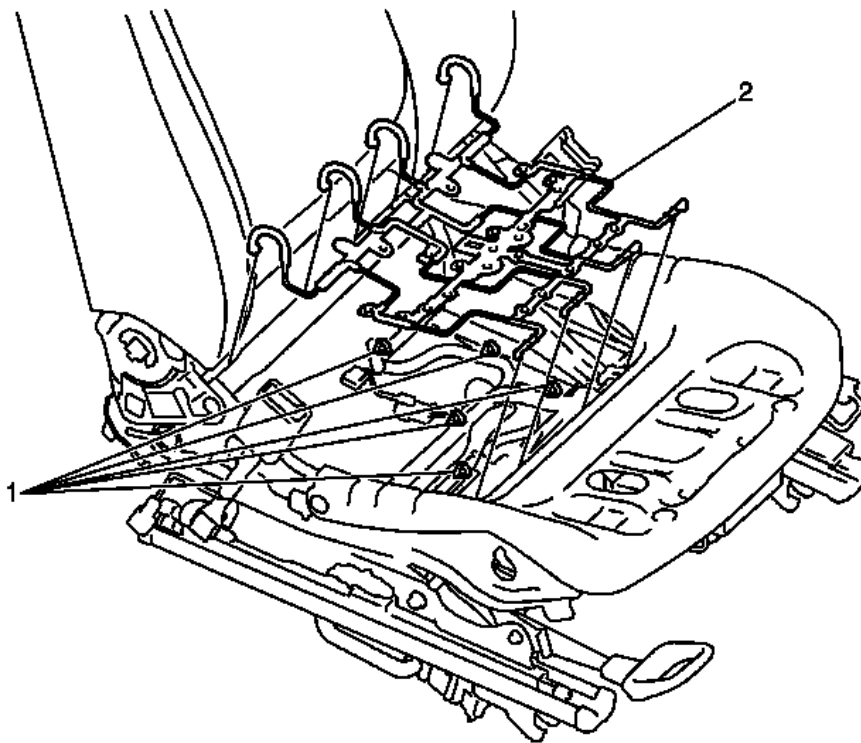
Driver Or Passenger Seat Cushion Pad Wire & Harness Clips
